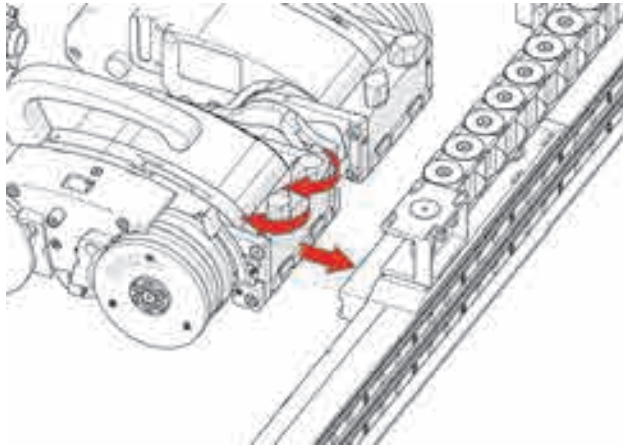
Mount raster arm to the right drive module's swivel mount
